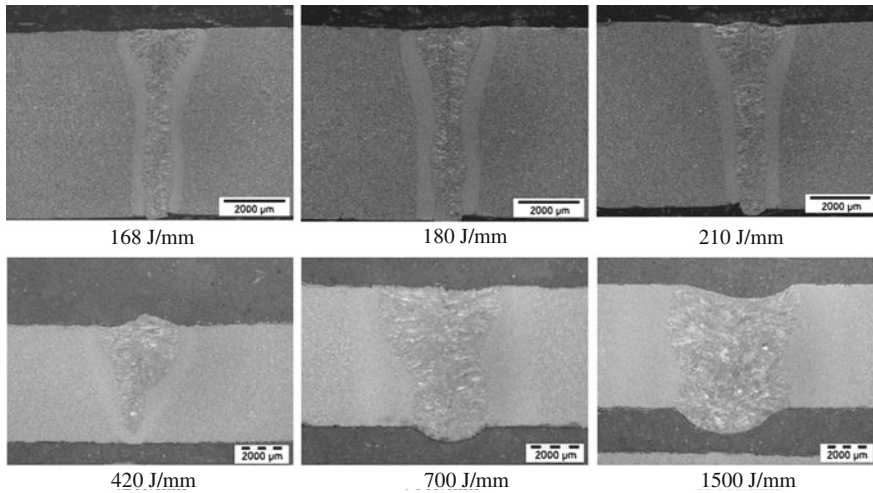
Cross sectional macrographs of laser welds in 9Cr-1Mo steels 6 mm thick plates [18]
